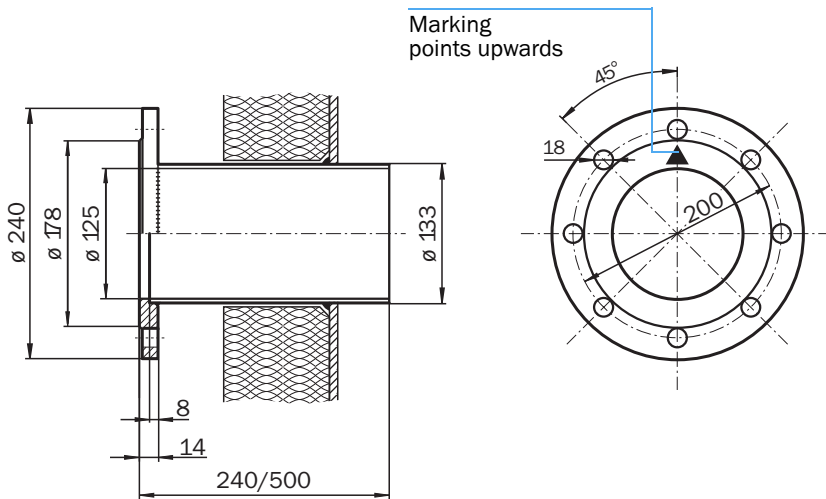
Flange with tube for installing the GM35 SR-unit on the duct
